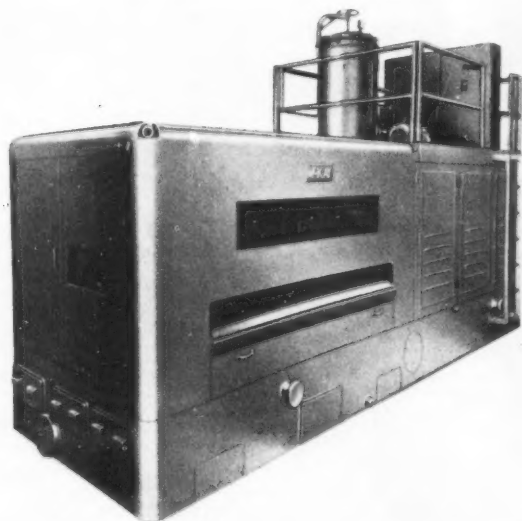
(below) An example from the range of McKay steel sheet flexing machines being built in this country
